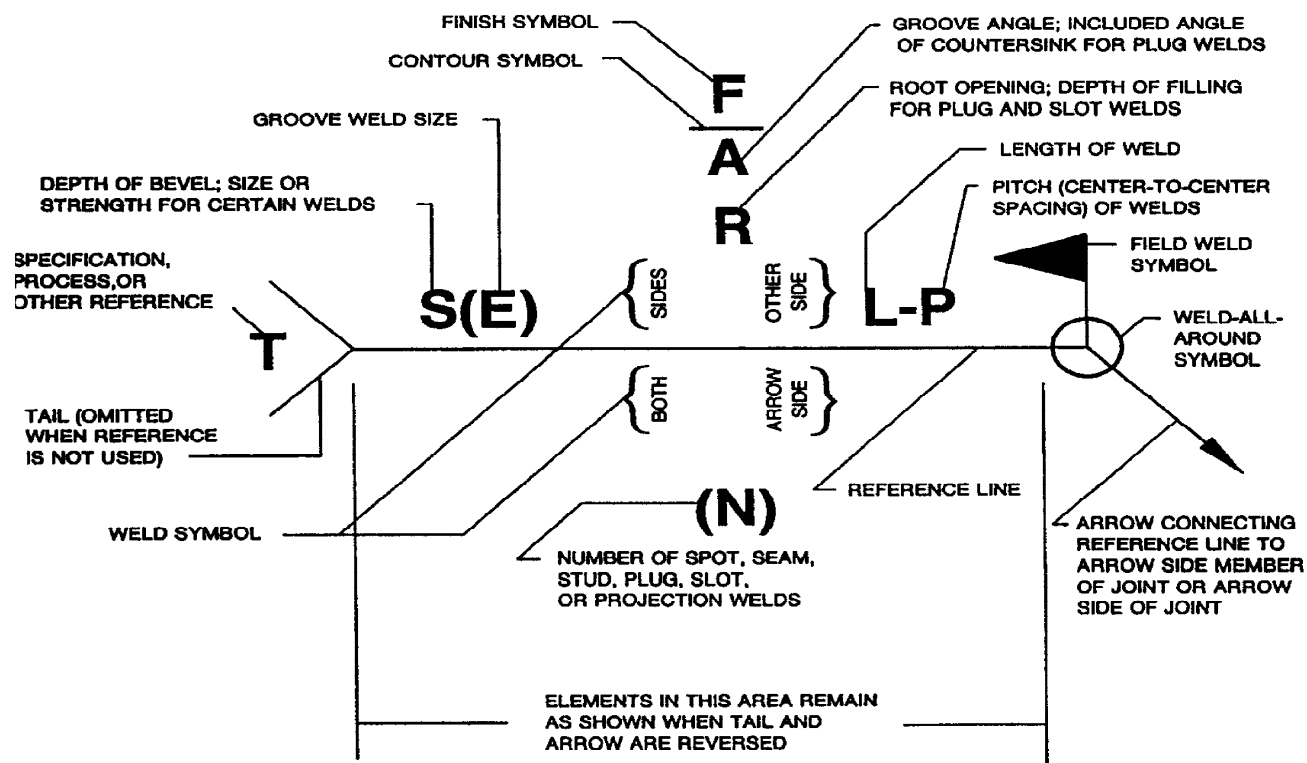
Standard Location of Elements of a Welding Symbol
